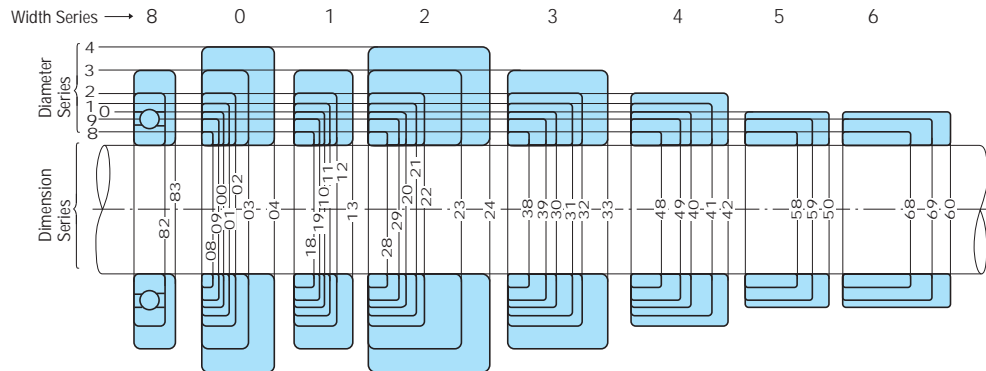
Comparison of Cross Sections of Radial Bearings (except Tapered Roller Bearings) for various Dimensional Series
